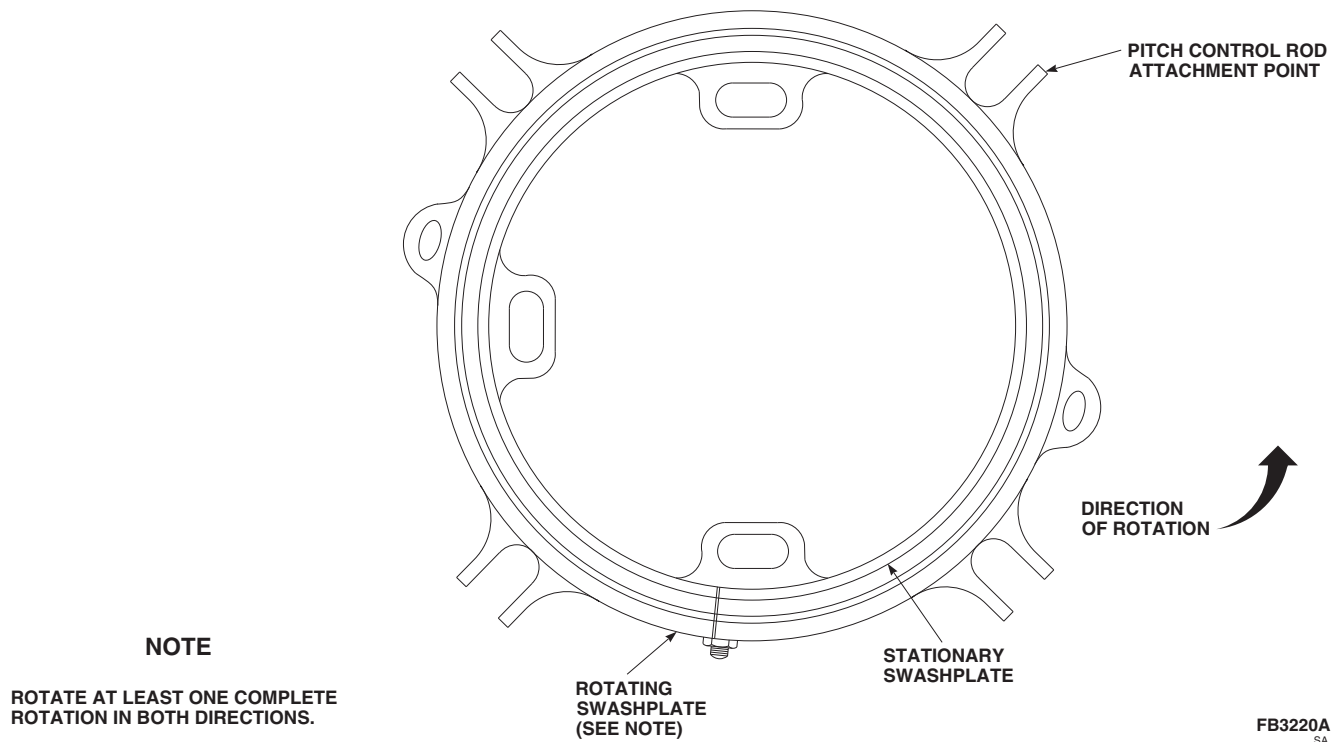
INSPECT SWASHPLATE BEARINGS
